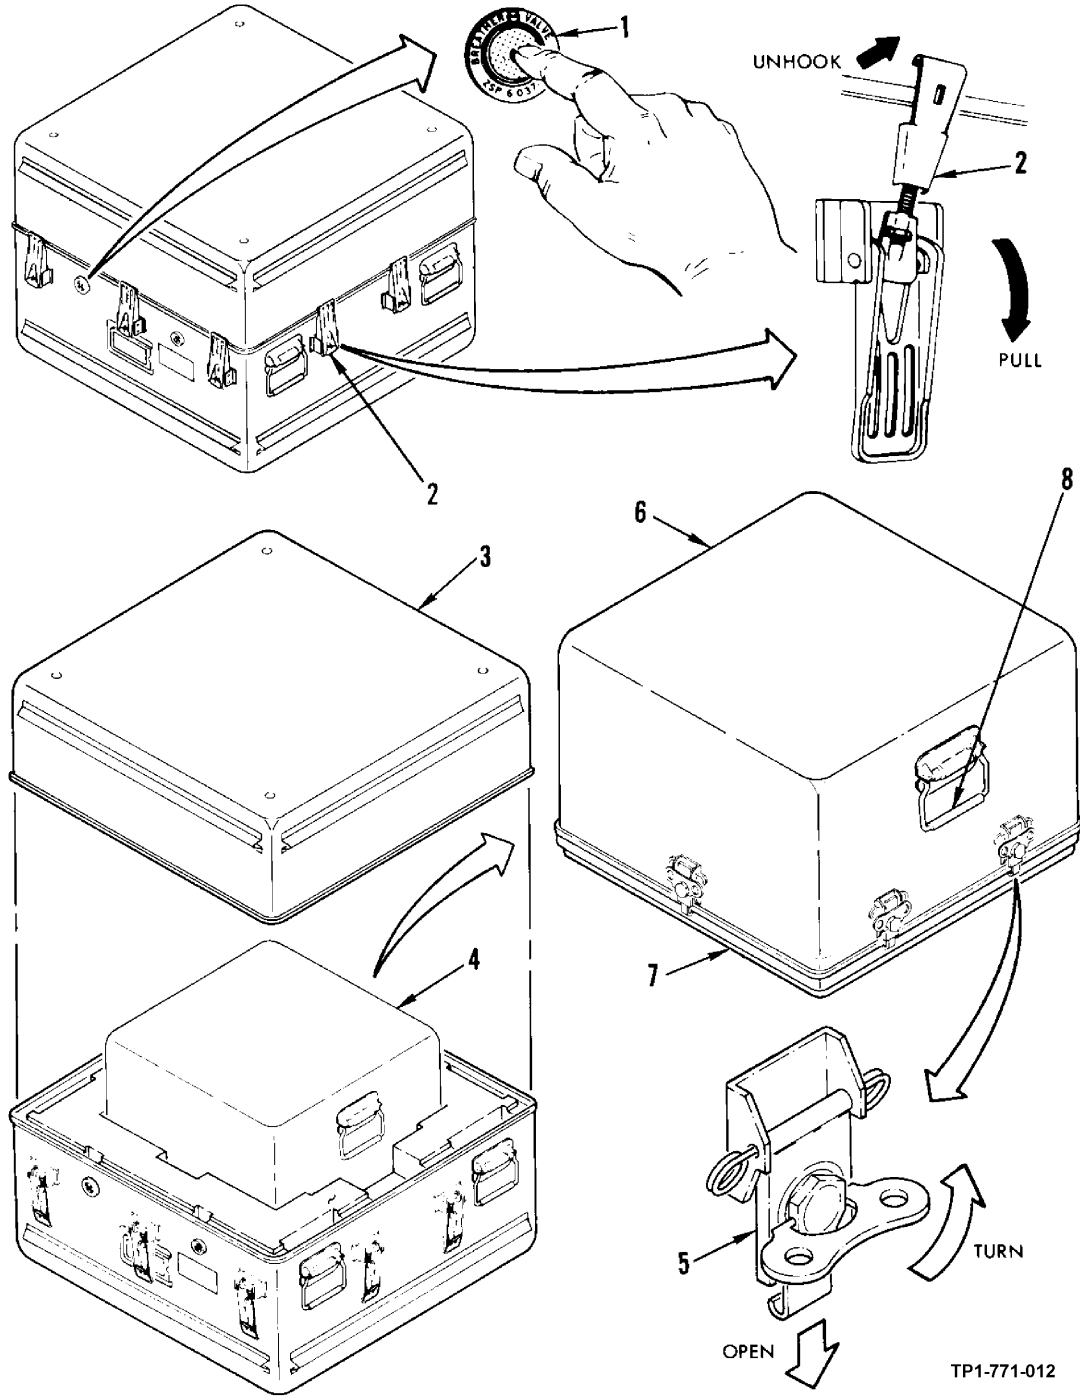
Inner Case Removal from Shipping and Storage Container
